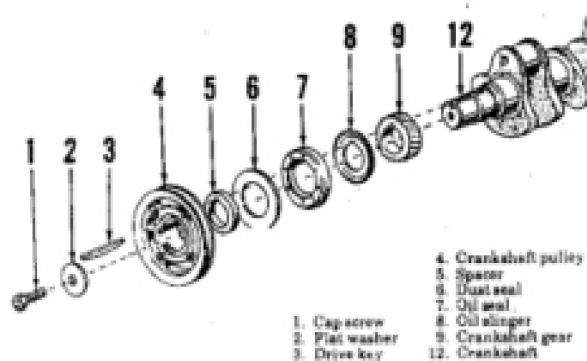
Crankshaft gear installation is shown for all models. Dust seal (6) and oil seal (7) are pressed into timing gear cover from inside and ride on spacer (5) on late production tractors; on early units, dust seal and oil seal ride on crankshaft pulley hub.
